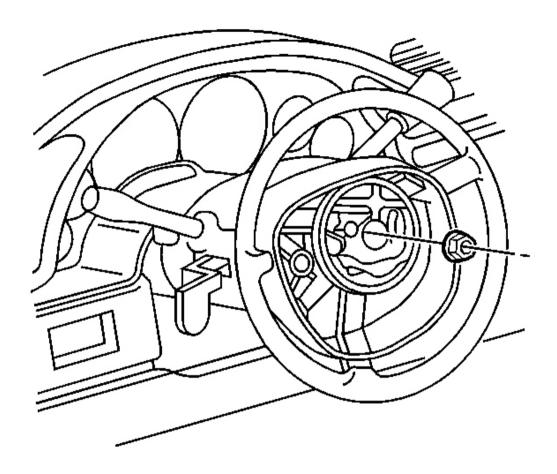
Steering Wheel Set Nut Courtesy of GENERAL MOTORS CORP.
